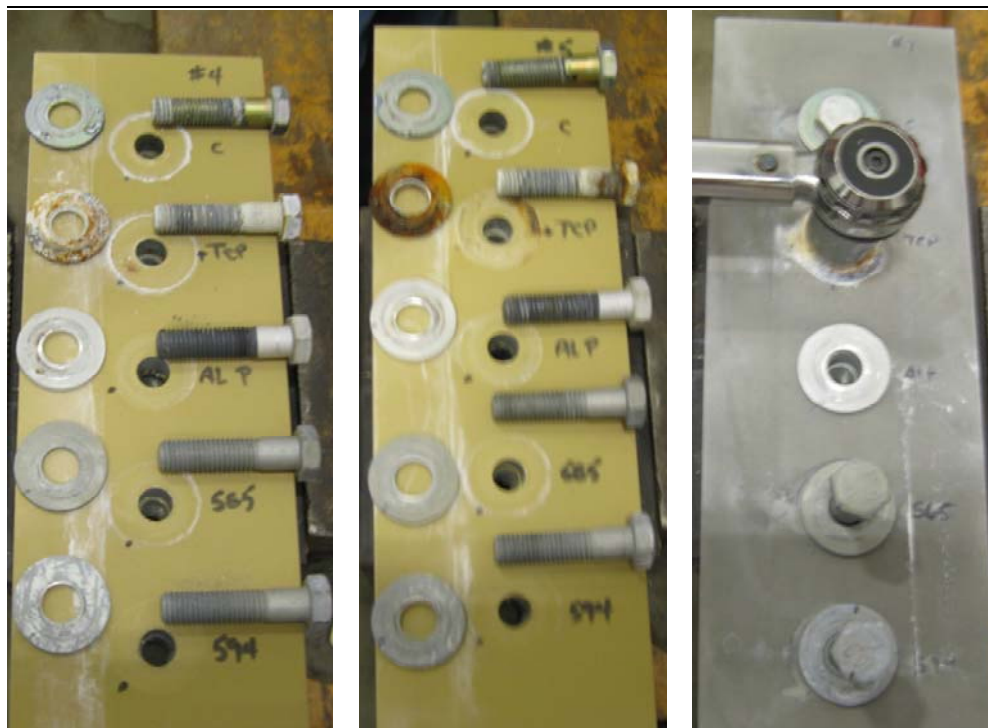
Plates 4–6 disassembled after 120 cycles GM9540P.
